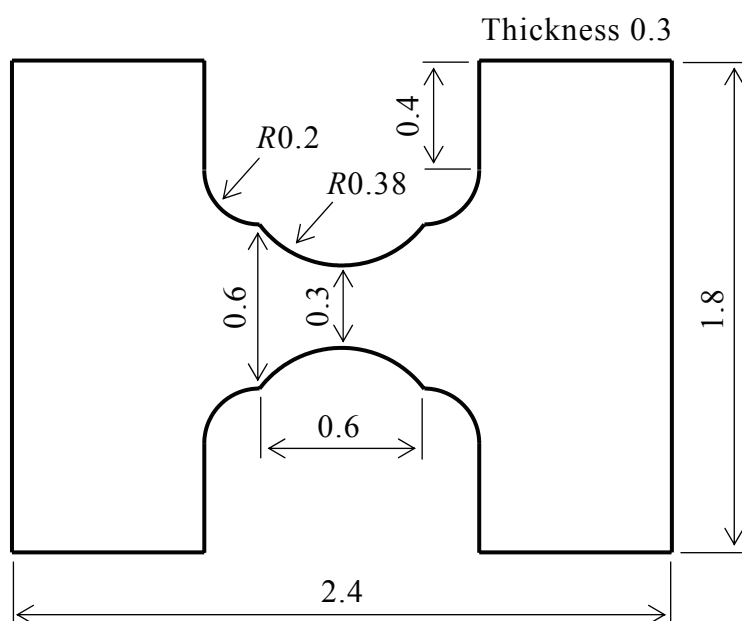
Shape and dimension of JIS specimen of spot welded joint (unit : mm).
